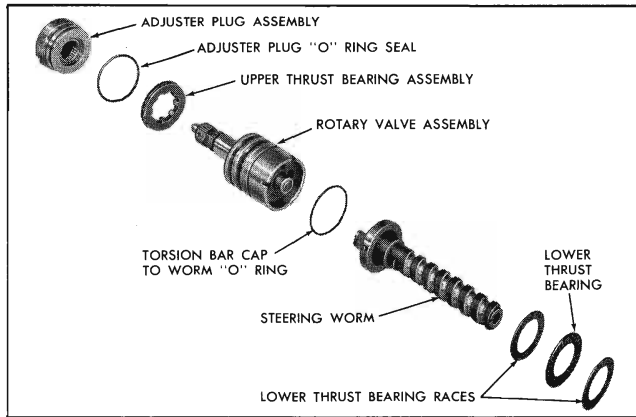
A-12 Location of Torsion Bar Cap to Worm "O" Ring
